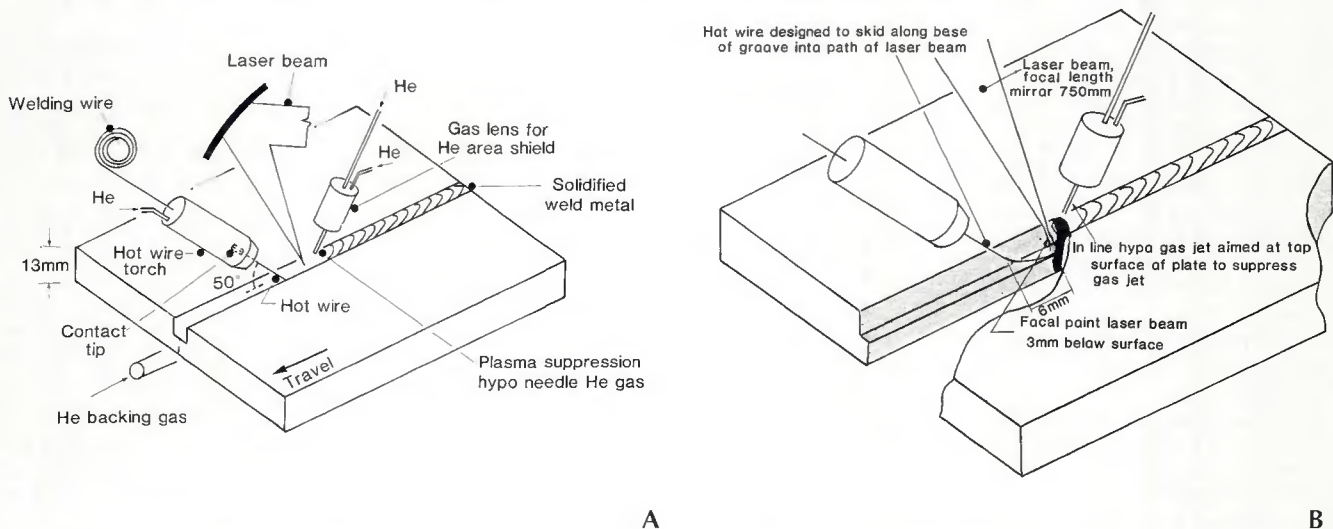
A — Schematic diagram of experimental setup for laser beam welding with hot welding wire feed; B — detail of hot wire filler metal addition.
